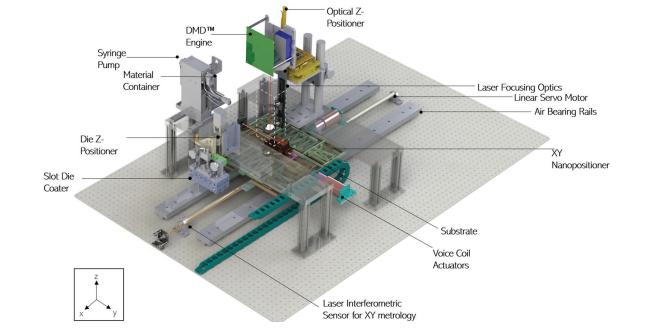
CAD rendering of the microscale selective laser sintering system (µ-SLS) assembly.
